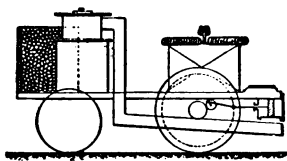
De Dion & Bouton Steam Road Car (Side Elevation).
